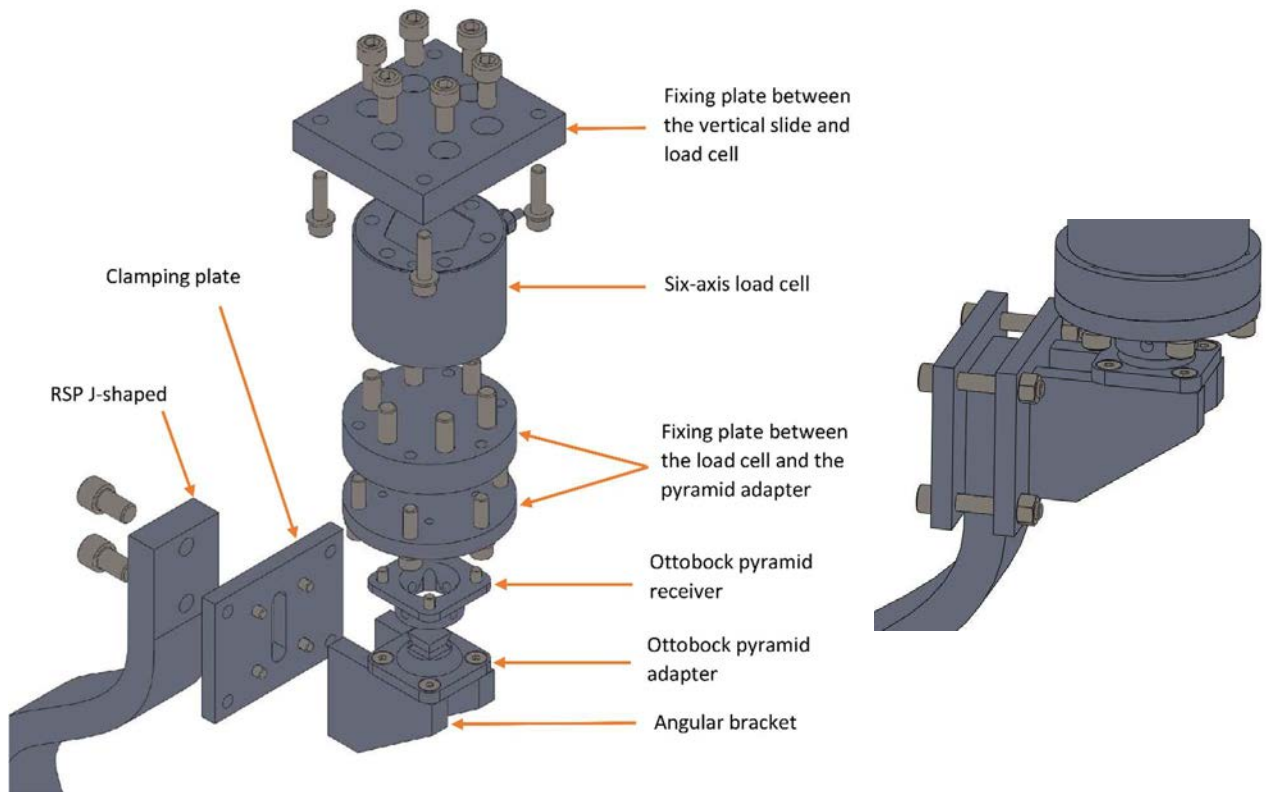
| To the left: Exploded view of the RSP-load cell-vertical slide connections. To the right: clamp fixing.
